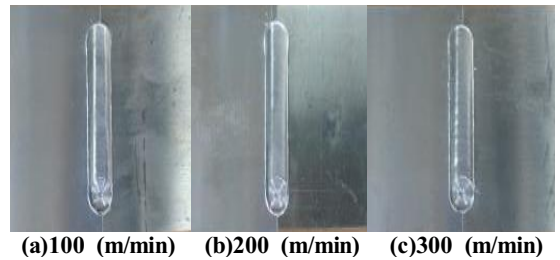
The welding parts for various welding speed at 3000 (rpm)
